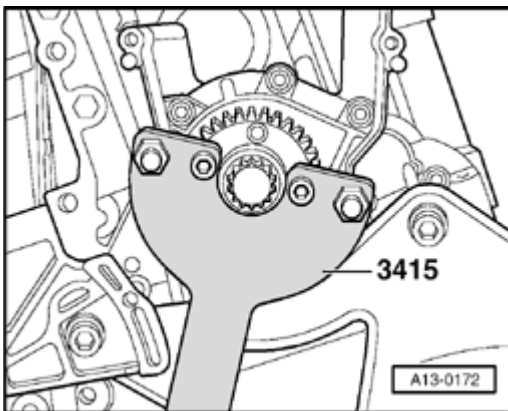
Removing Crankshaft Toothed Belt Sprocket
